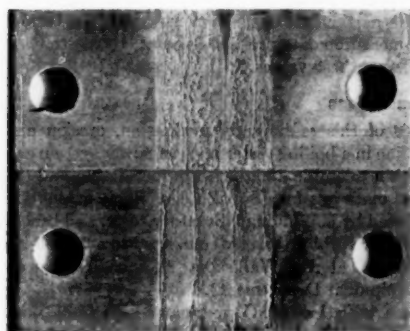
Corrosion specimen, 2X. A106 carbon steel. Pitting occurred only on side facing KEL-F with high and low oxygen.
